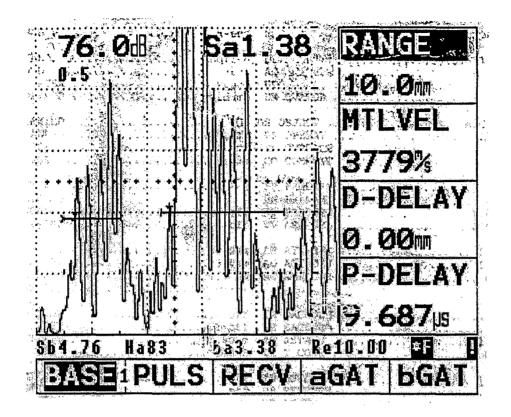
Ultrasonic echo pattern for MIG 21 Sintered brake pad
